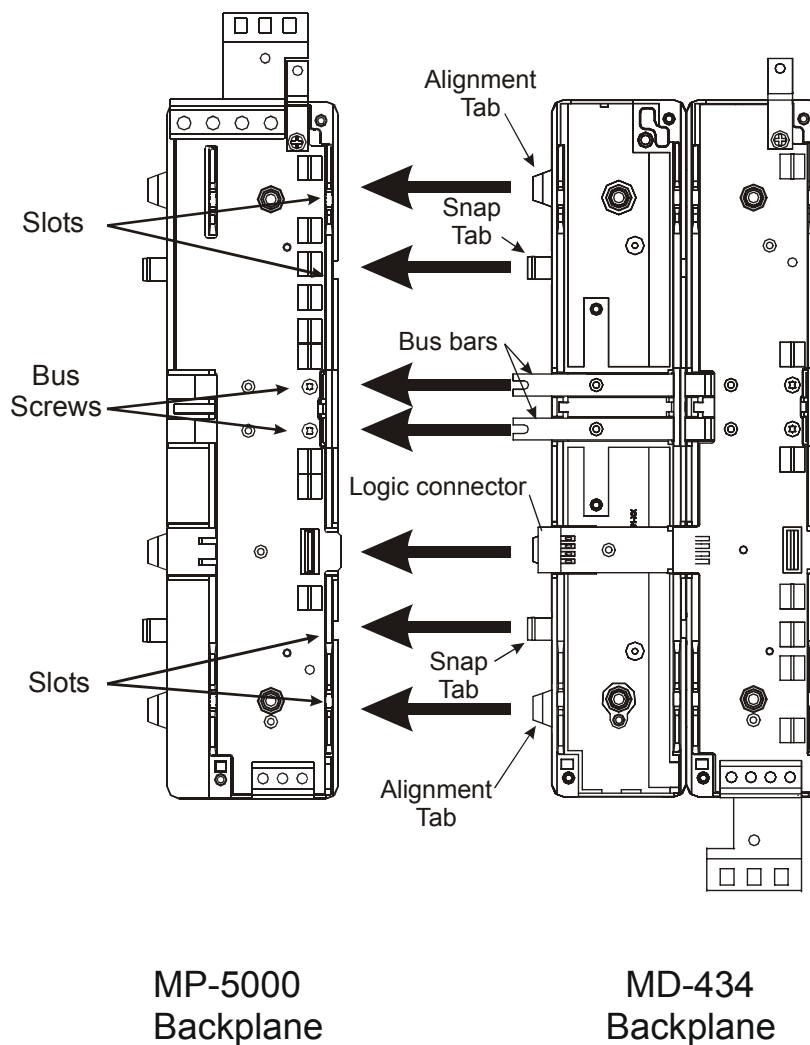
Assembling the Drive Module Backplane to the Power Module Backplane.
